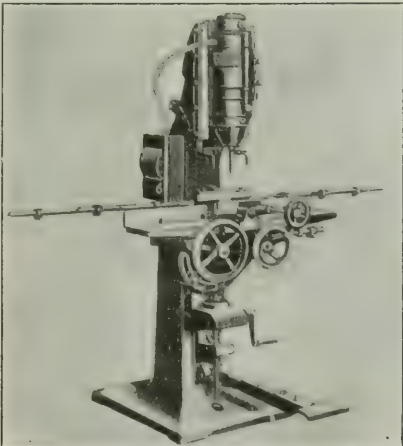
THE "OLIVER" MORTISING MACHINE.
